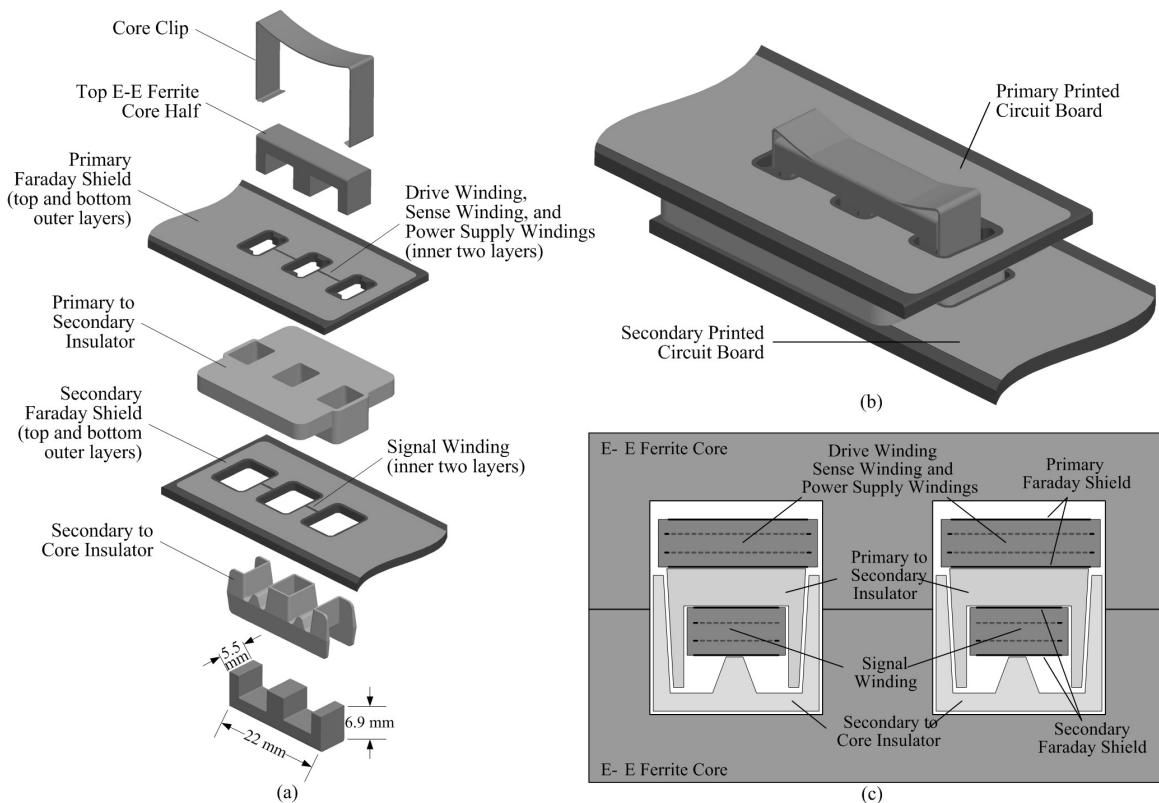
Isolation transformer construction using an E-E ferrite core and printed circuit board traces for windings: (a) expanded component view, (b) assembled view (c) cross sectional view.
